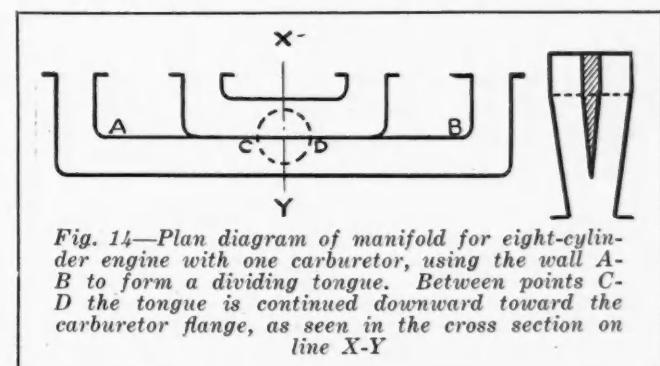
Plan diagram of manifold for eight-cylinder engine with one carburetor, using the wall A-B to form a dividing tongue. Between points C-D the tongue is continued downward toward the carburetor flange, as seen in the cross section on line X-Y
